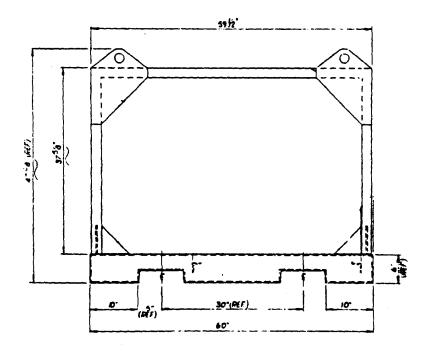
Hydraulic Power Package: Basic Handling Dimensions
